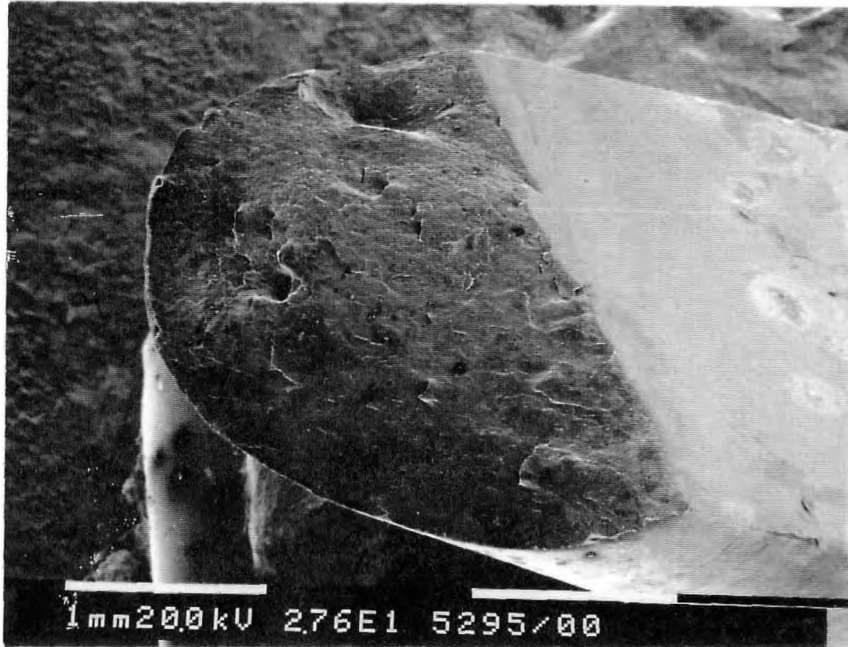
Fracture surface of the Al-Ni alloy cast at 769 mm/min.
